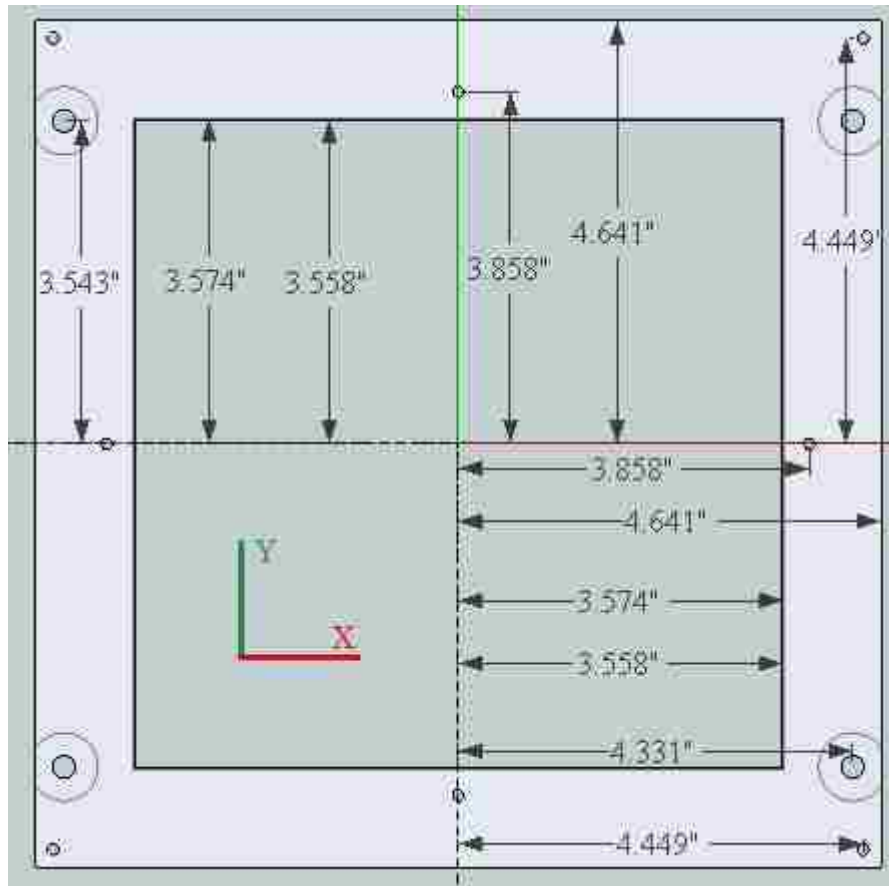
Top view of the 20x20 cm² middle trimmer aluminum plate illustrating the in-plane and cross-plane dimensions. The middle trimmer is square, such that all non-hole dimensions are equal in the in-plane and cross-plane dimensions.
